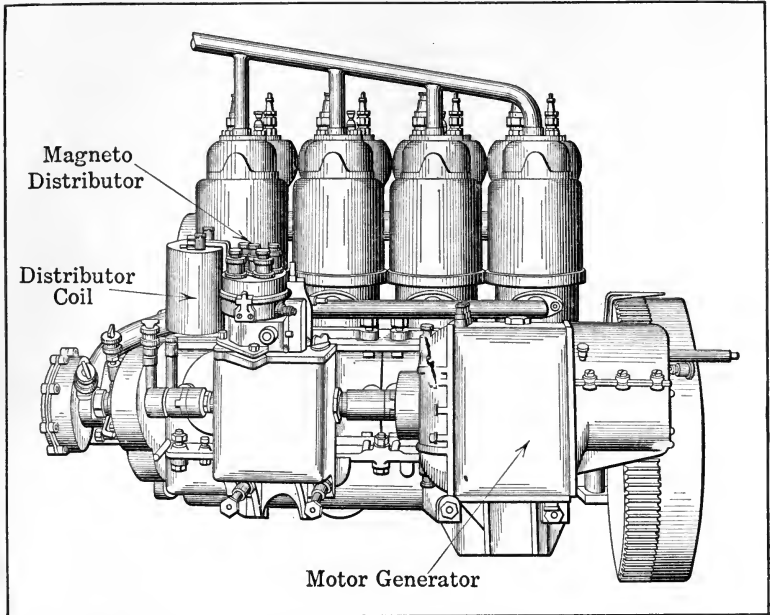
Motor Generator Employed in Starting Cadillac Motor also Furnishes Current for Ignition and Lighting.
